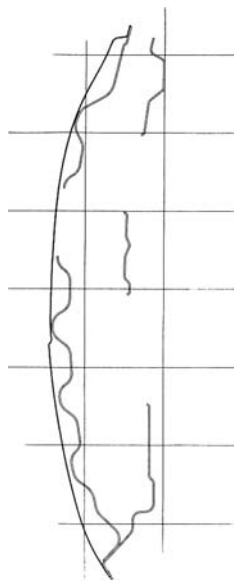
Vertical door section showing the inner, outer, and STAR panels
